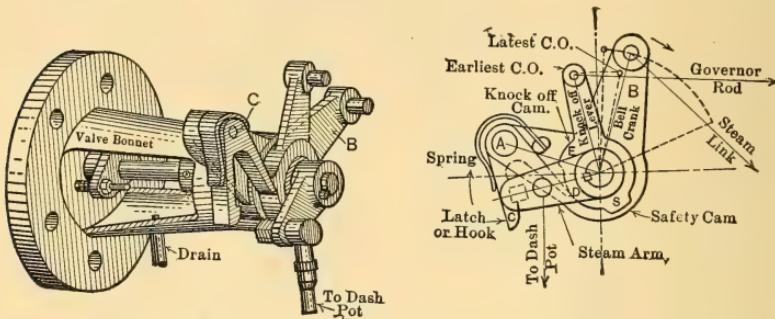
Details of Corliss Trip-Cut-off Gear.
